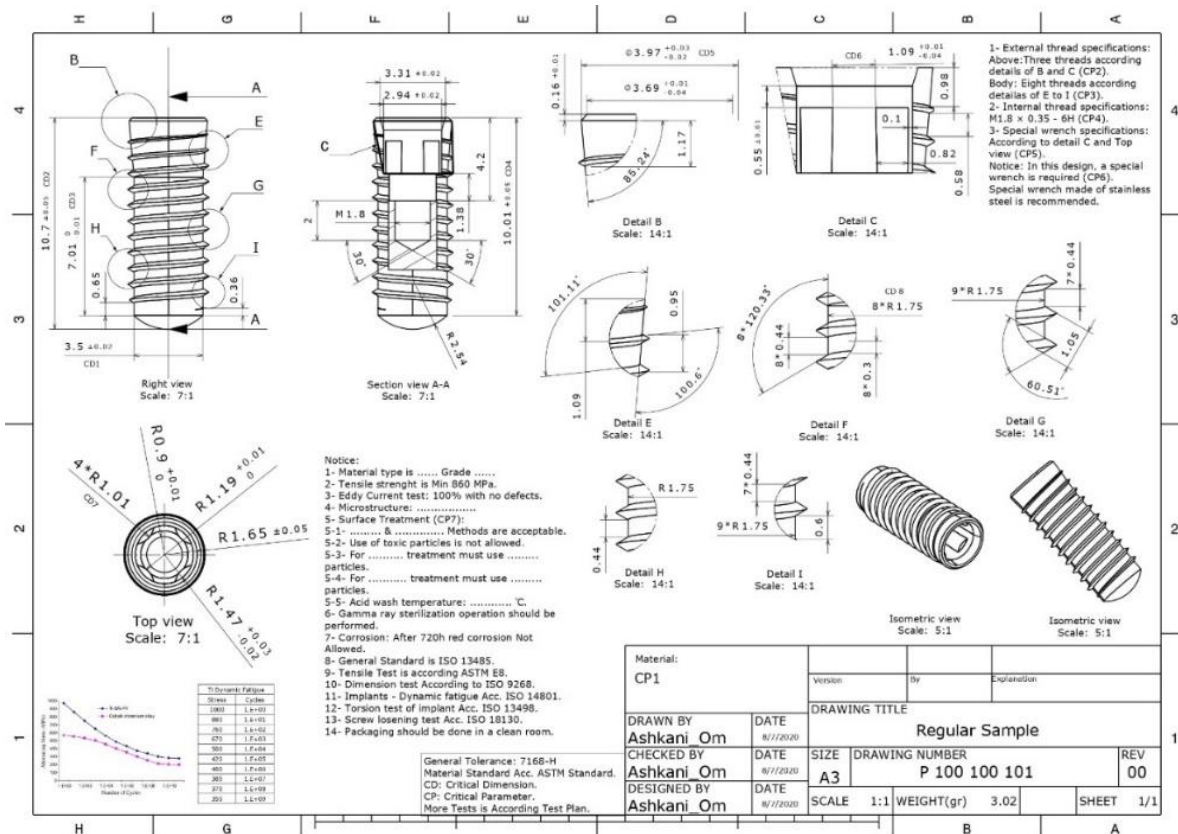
2D drawing of regular-type dental implant (Designed by Omid Ashkani, dimensions may differ from the actual sample).
